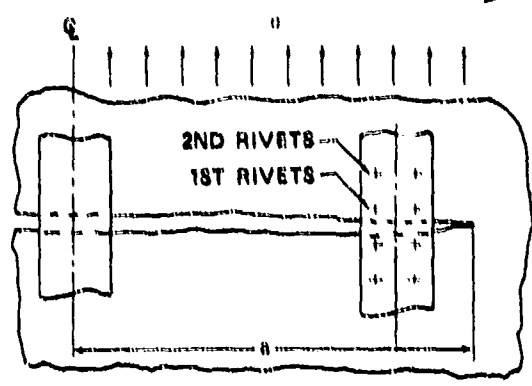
RIVET SHEAR LOAD, OUTER CRACK STOPPER TO SKIN RIVETS
